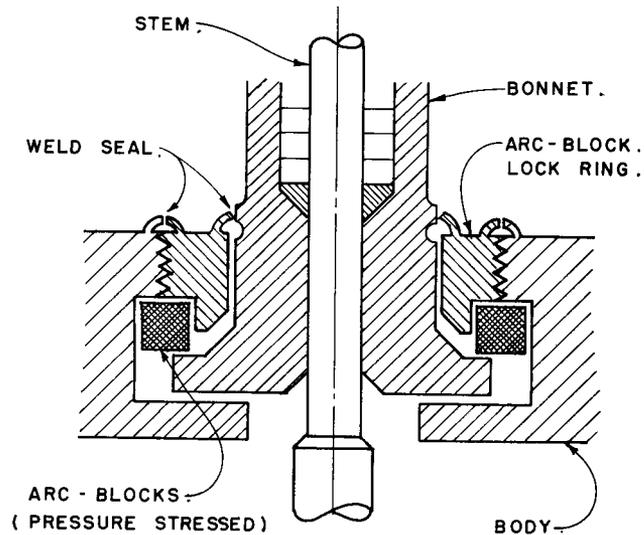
Non-Stressed Thread in Screwed Bonnet Design.
